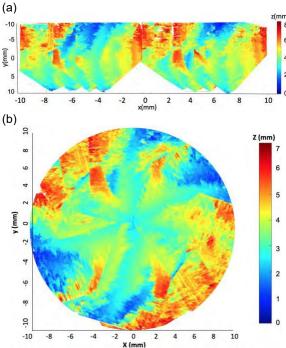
stitched panorama surface for tool body (a) and tool bit (b)
